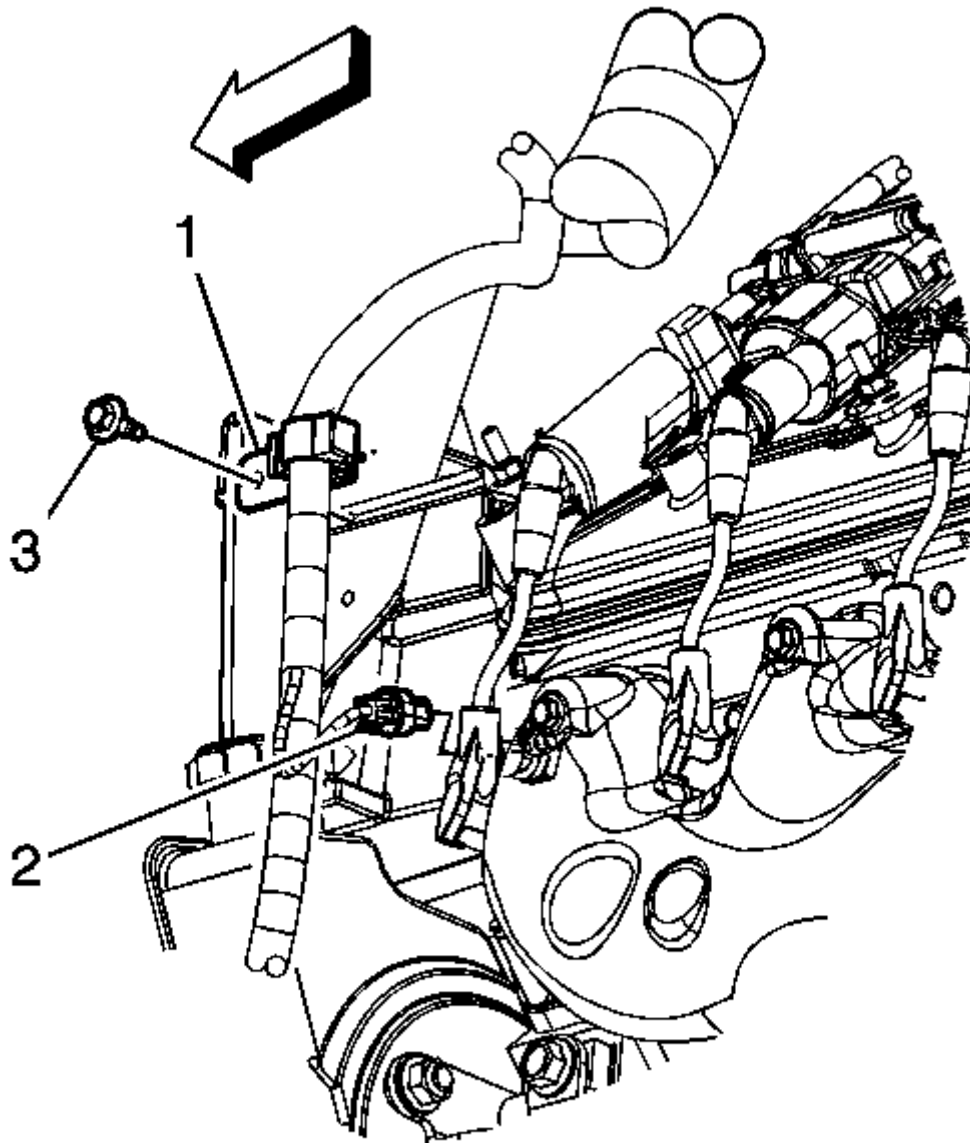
View Of Engine Wiring Harness, Clip, Bolt & Connector
